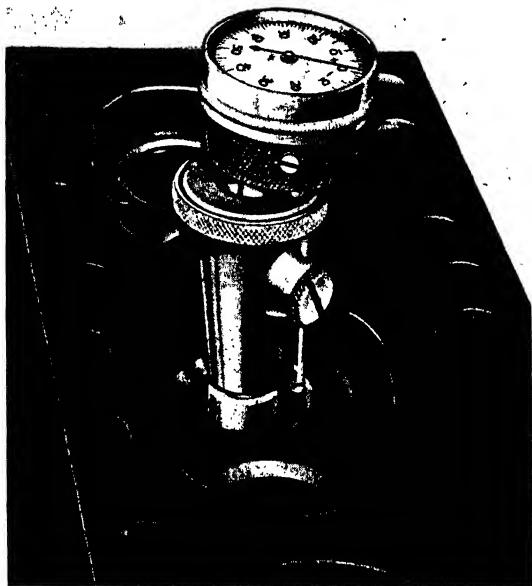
DIAL GAUGE USED TO TEST VALVE SEATINGS FOR CONCENTRICITY BEFORE AND AFTER REFACING
